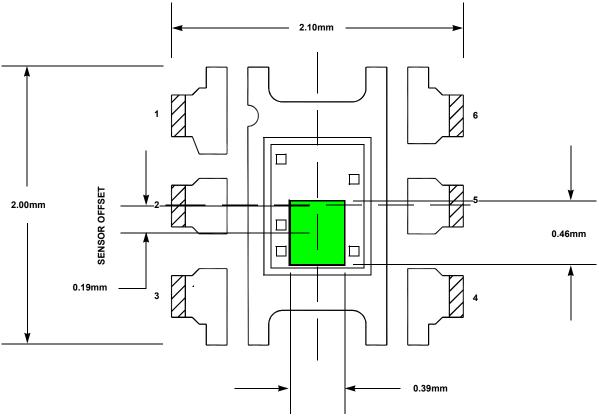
6 LD ODFN SENSOR LOCATION OUTLINE
